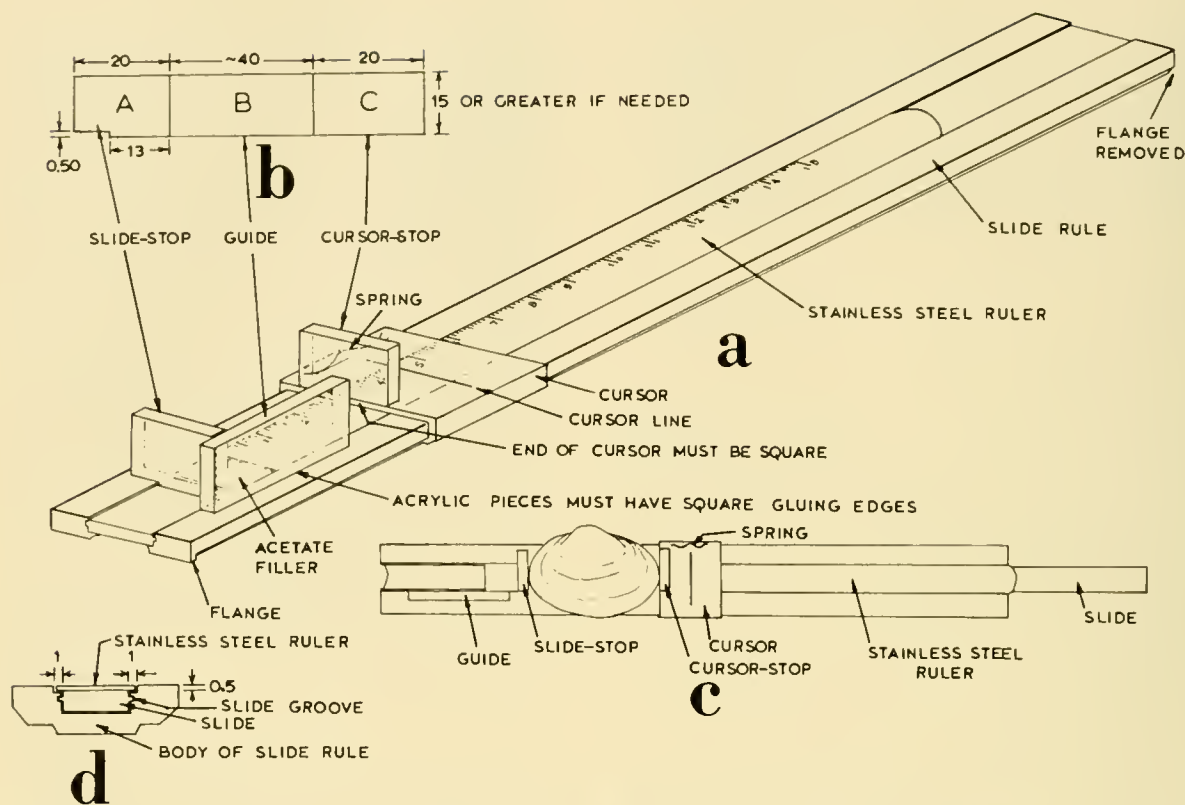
Assembly of shell slide-meter. (a) Assembled slide-meter, (b) Dimensions of acrylic stop and guide pieces, (c) Method of measuring large shells (i.e. pull slide-stop past guide), (d) Cross-sectional view of slide-meter. All measurements are in millimeters.
